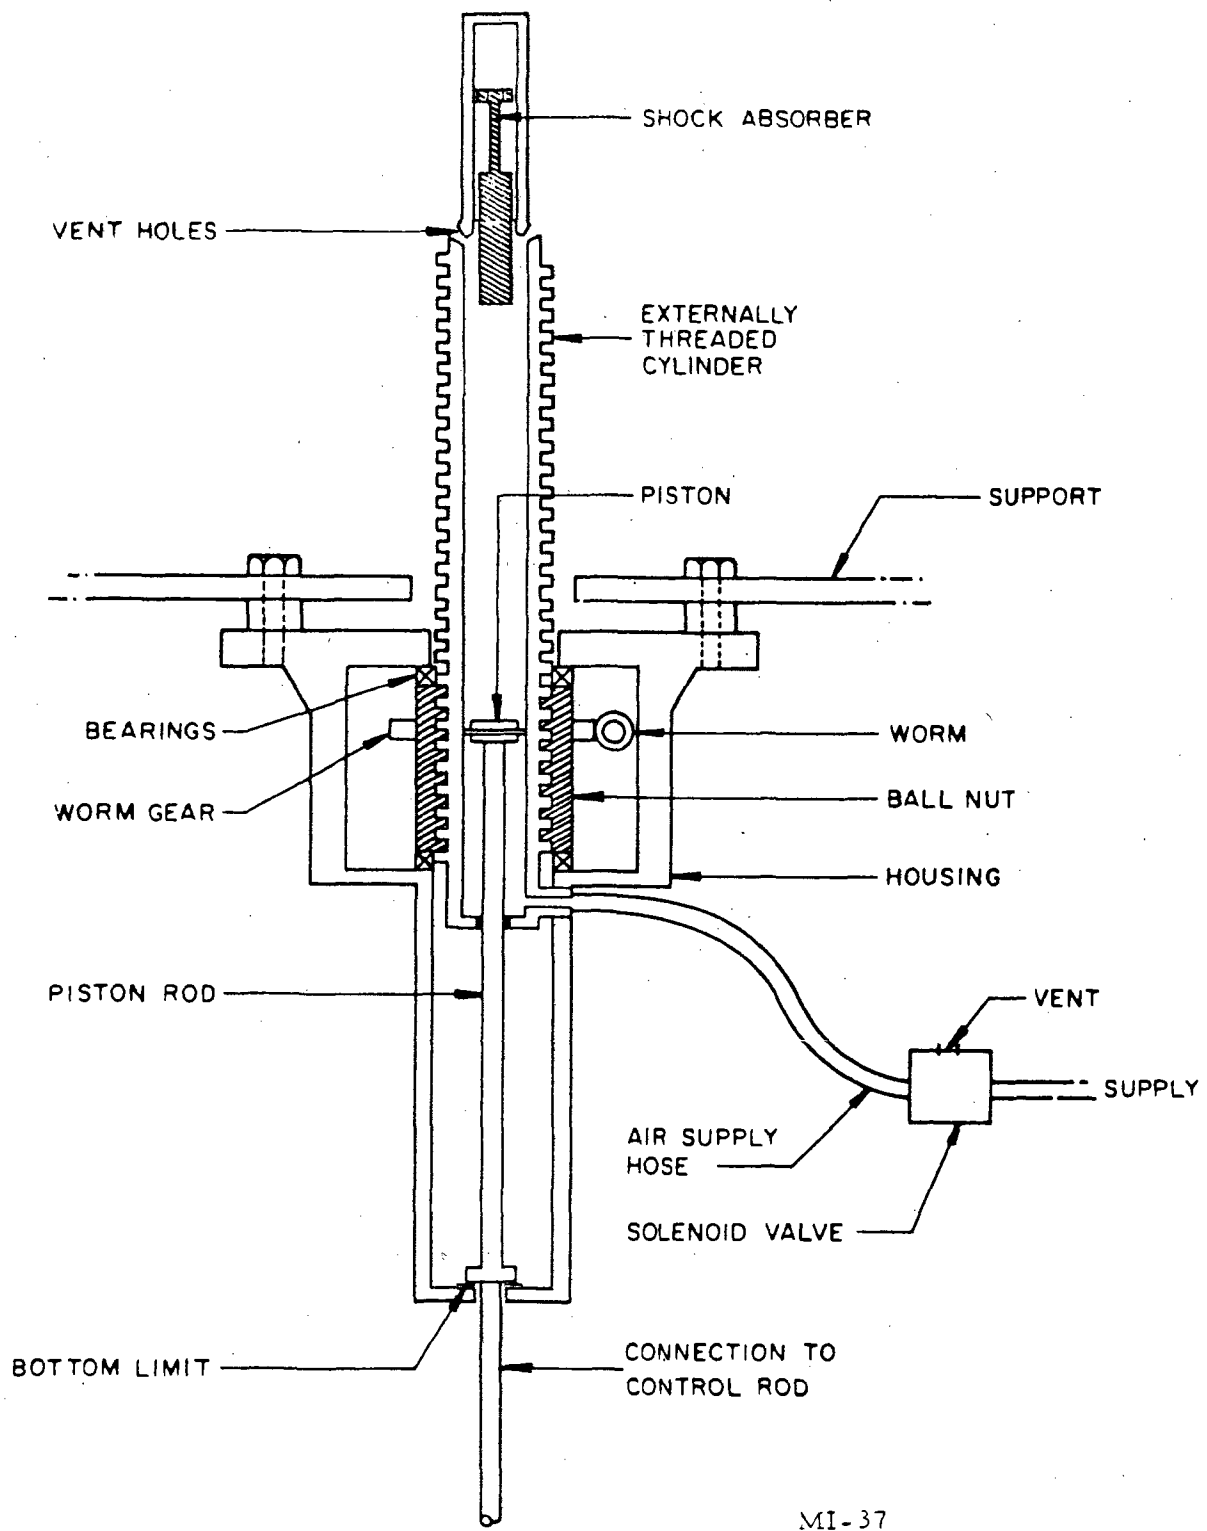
Schematic Drawing of Transient Rod Drive
